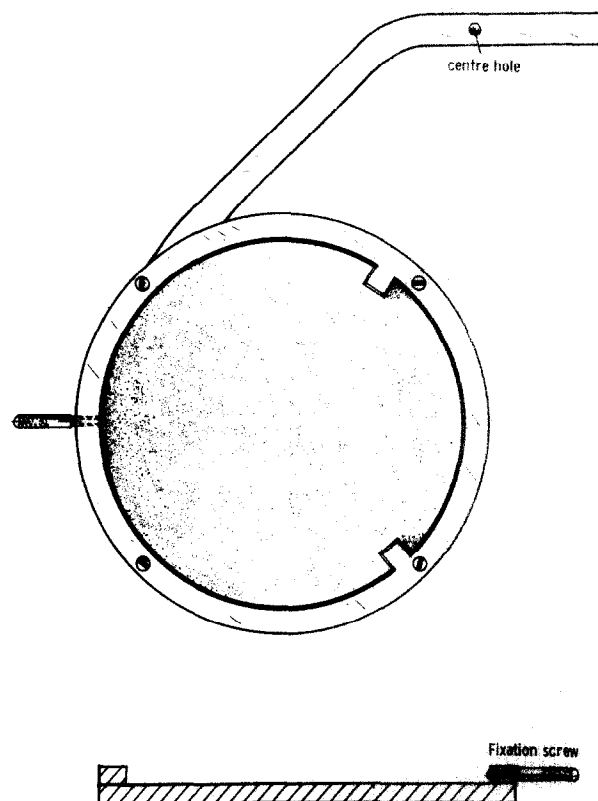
Iron disk with connecting bar. Side with cavity to hold resin plate is shown.
